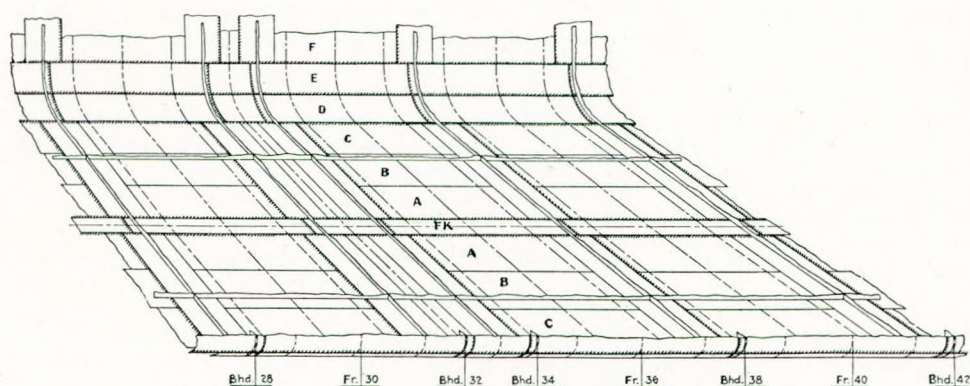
Bottom shell plating. Shaded lines indicate field welds.
